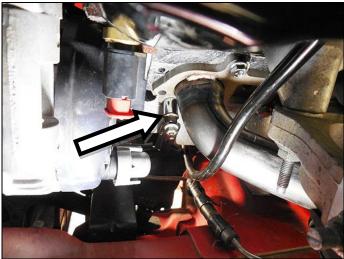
Dipstick tube mounting bracket spacer w/ OEM bolt
